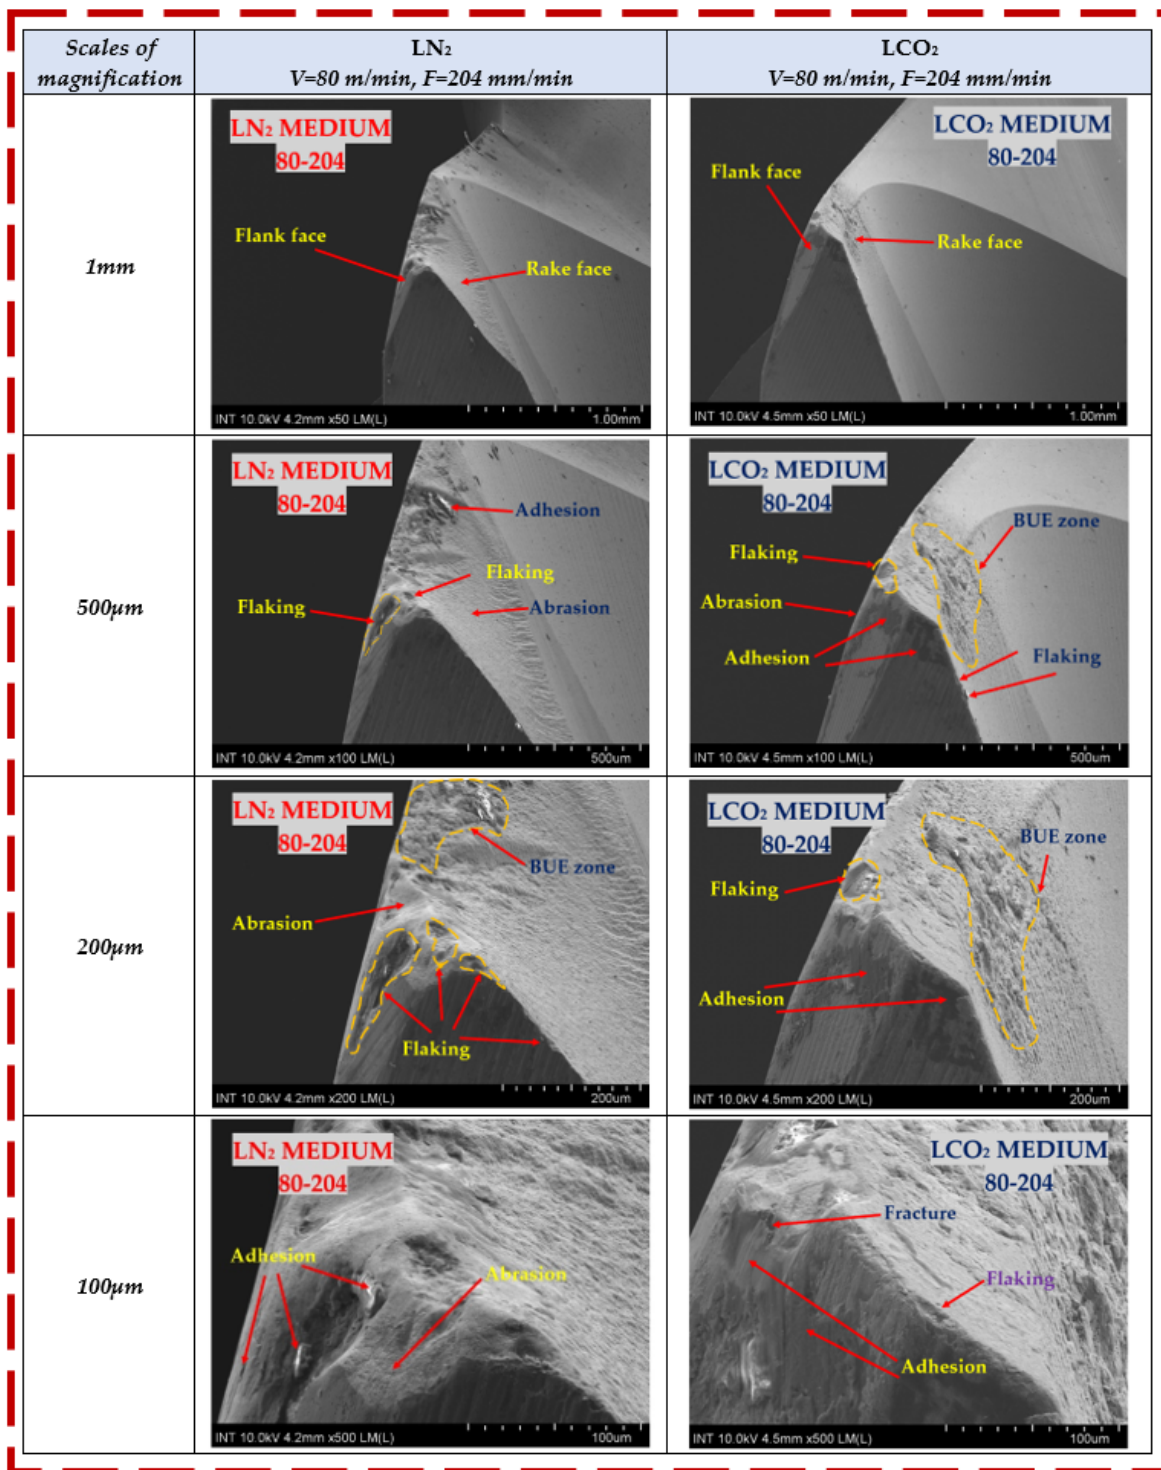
Variations in flank wear and rake wear under LN₂ and LCO₂ machining settings at a cutting speed of 80 m/min and a cutting feed of 204 mm/min.
